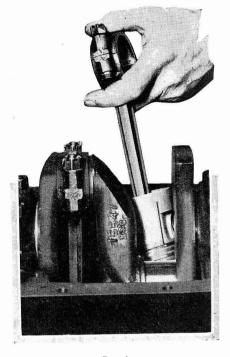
Showing the position of the crank web to enable the piston to be withdrawn.
